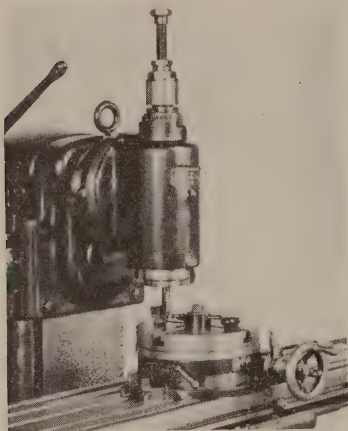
Vertical spindle attachment and rotary attachment or circular milling attachment.
